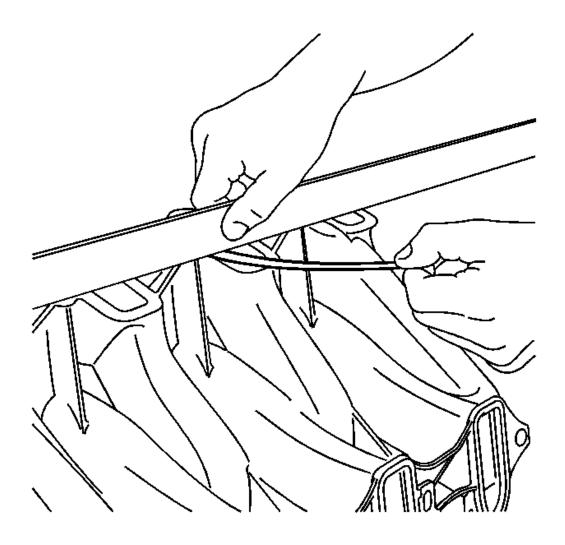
Inspecting Intake Manifold Cylinder Head Deck For Warpage Courtesy of GENERAL MOTORS CORP.
